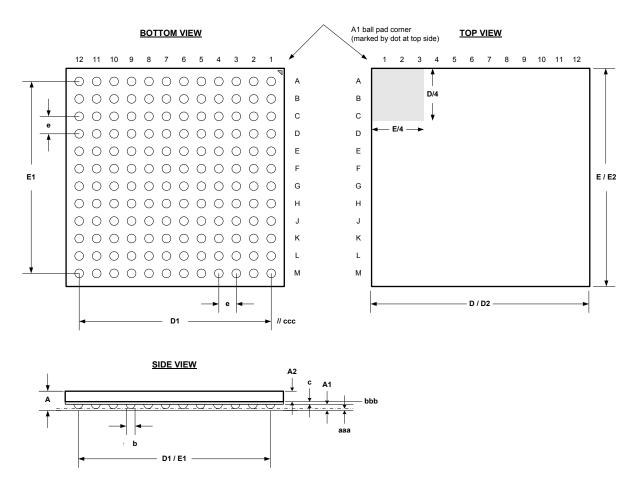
Package Outline Drawing FBGA144 - (JEDEC MO-192 VAR DAD-1)
